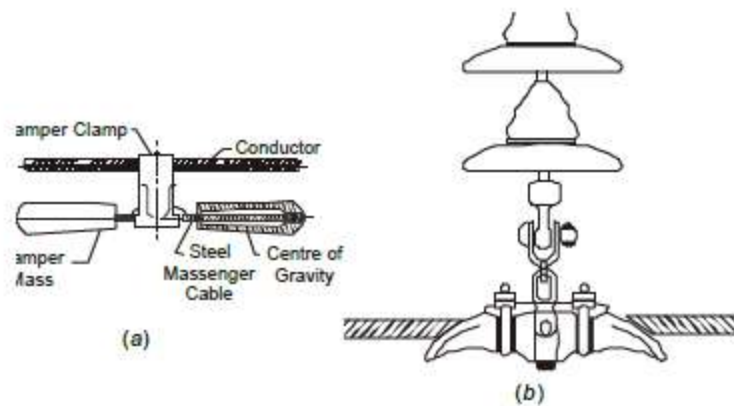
(a) Stockbridge Damper; (b) Suspension Clamp (Courtesy: Electrical Manufacturing Co., Calcutta).
